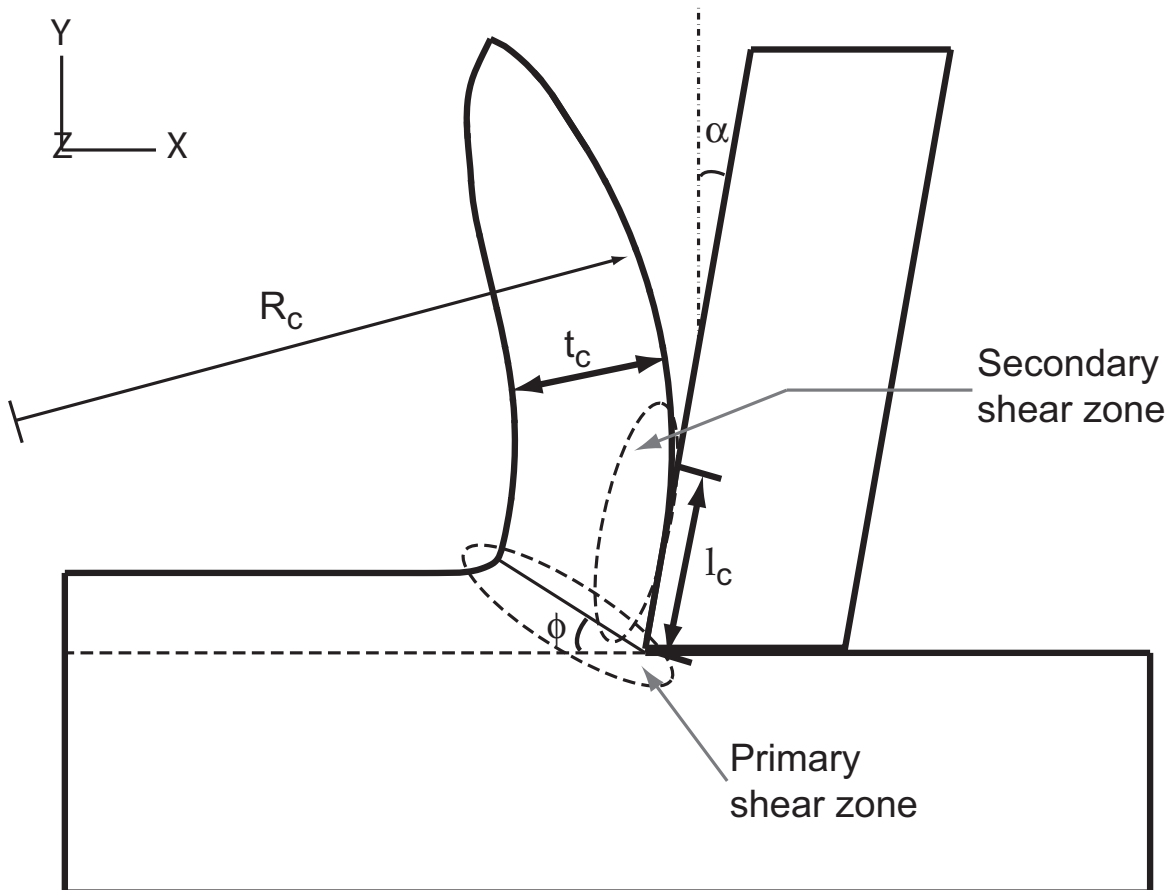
A two dimensional representation of orthogonal cutting showing the notable dimensions in a continuous chip.
